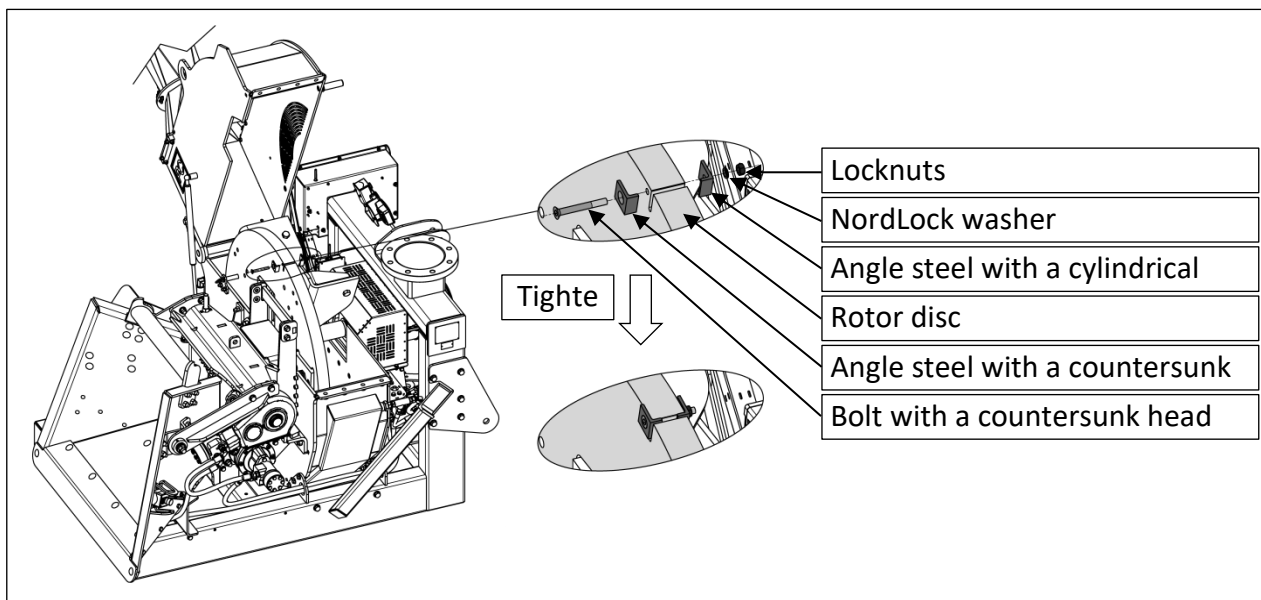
Changing the edge cutters (PC-3300-SEC and PC-3300-SIC only)
